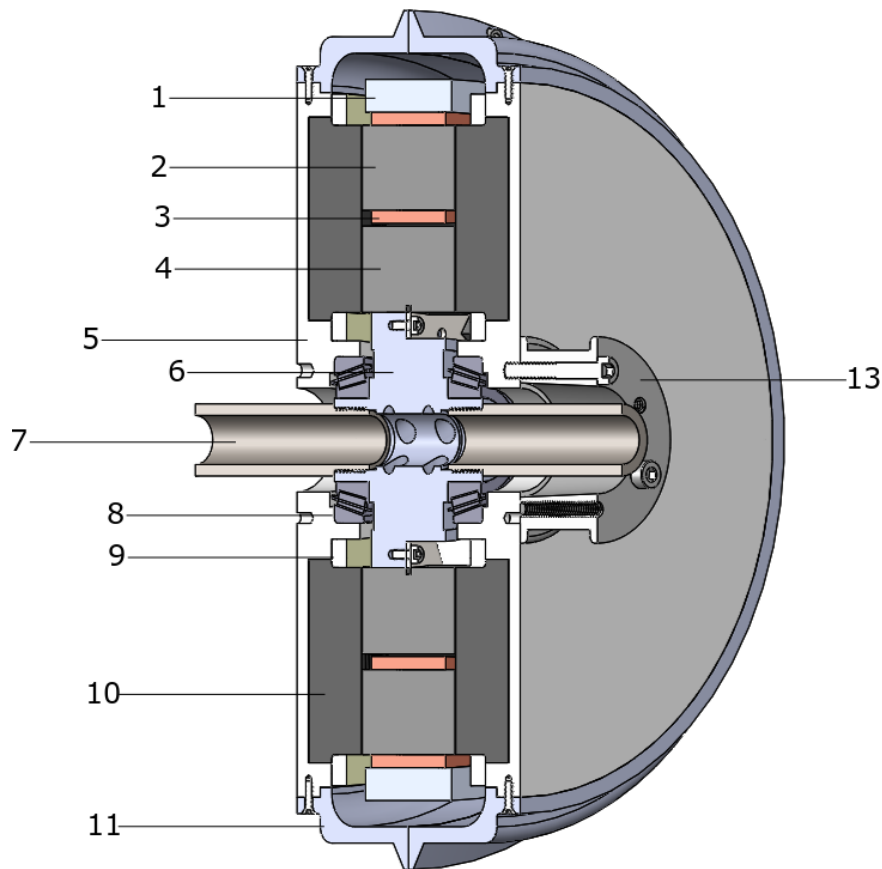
Cross section view of shaft-mounted AFSRM
